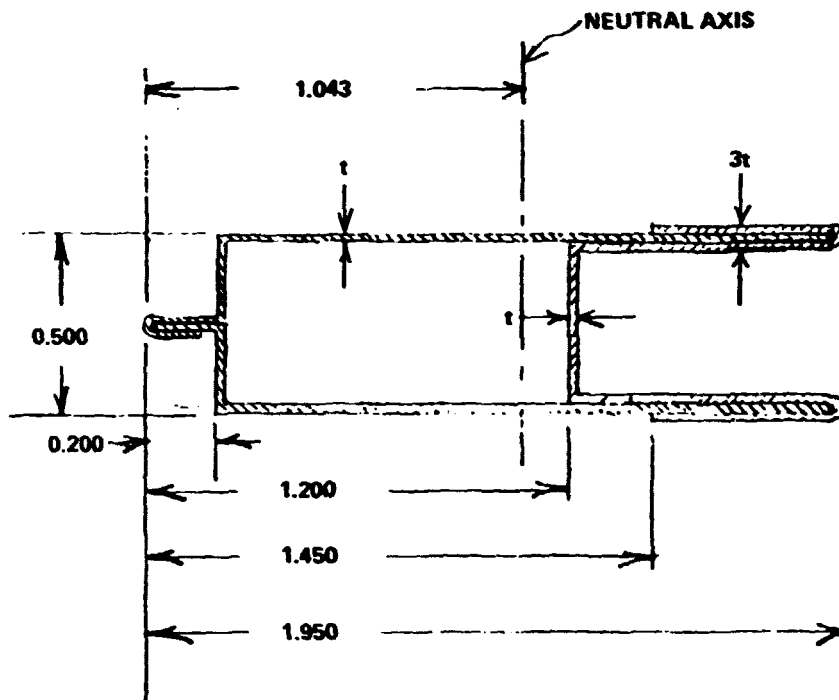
Proposed design of the shield for the foreplane assembly. Design consists of three parts. The parts are continuously assembled to each other by rolling over flanges left on top and side pieces, after the parts flow around and enclose the core of the foreplane.
